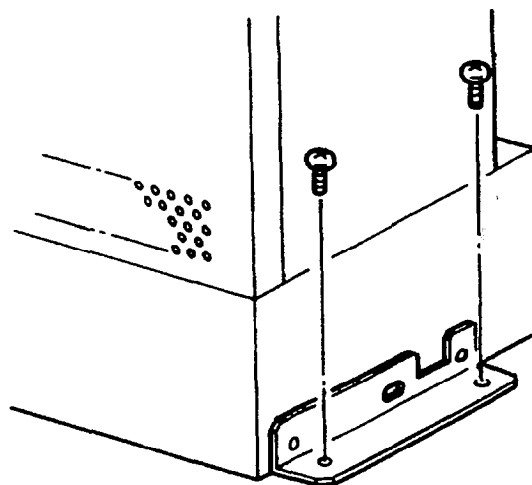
Attaching the Floor Mount Bracket to the Floor
